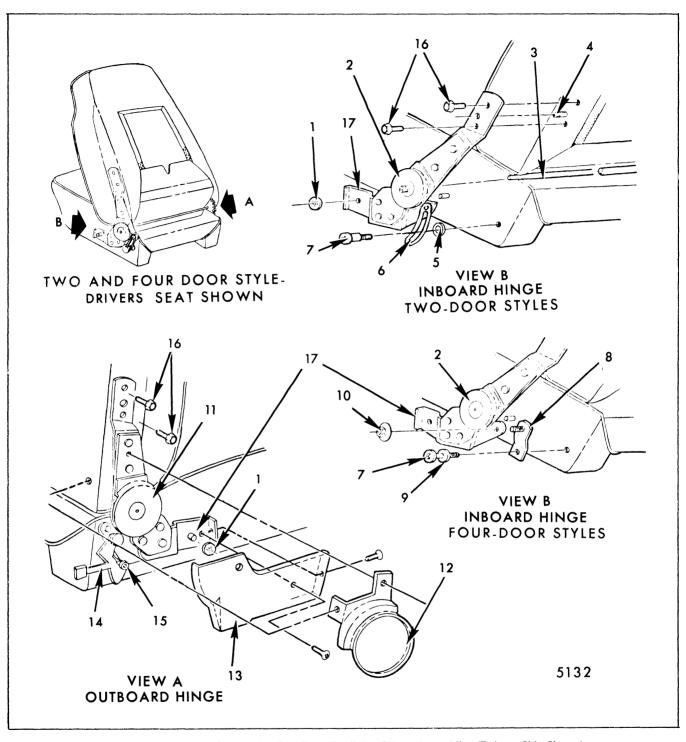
Custom Comfort Bucket Seat Back Reclining Hinge Assemblies (Drivers Side Shown)
